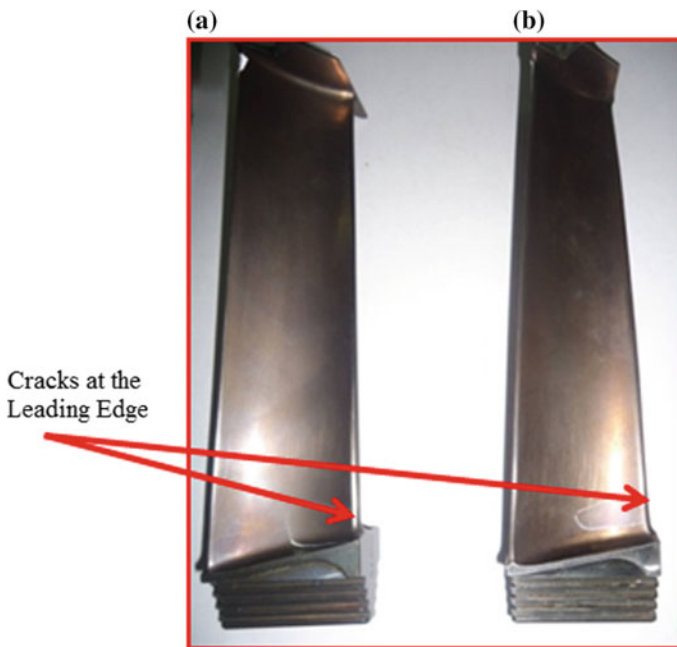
Cracks at the leading edge on failed blade after vibration fatigue test a ECM, b CNC milling
